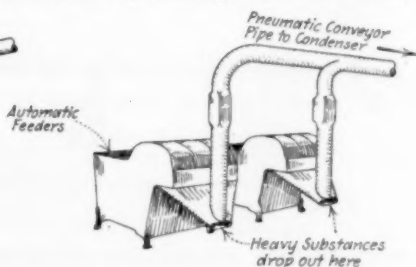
ARRANGEMENT IN OPENING ROOM WITH MECHANICAL CONVEYOR OMITTED
